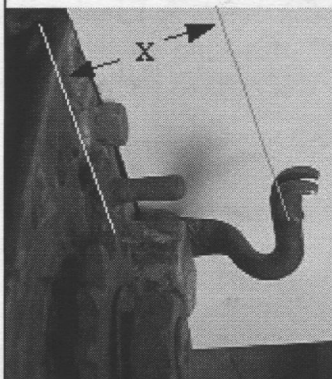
Figure C - old style bearing plate showing measurement "X" (42.5 to 43.5mm) on engine.
